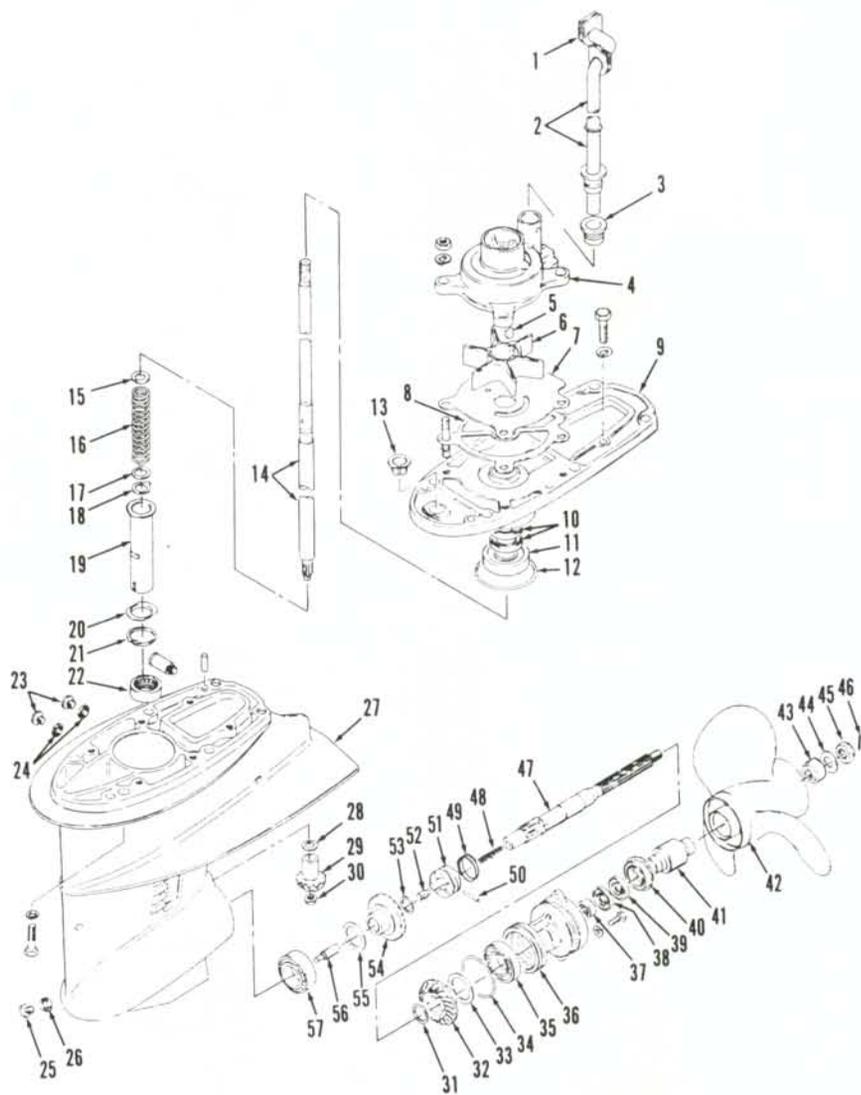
Exploded view of lower unit gearcase assembly.
